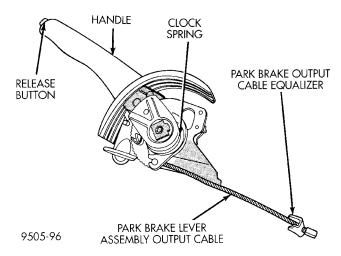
Brake Lever Assembly And Output Cable PARK BRAKE CABLES
